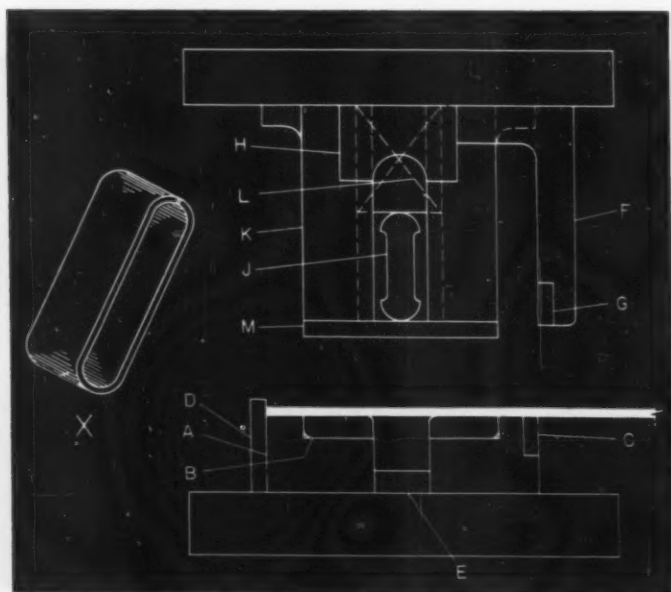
Work-piece, seen enlarged at (*X*), is fabricated from strip stock in one operation with the die shown. Horn (*J*) is in the fully extended position.
